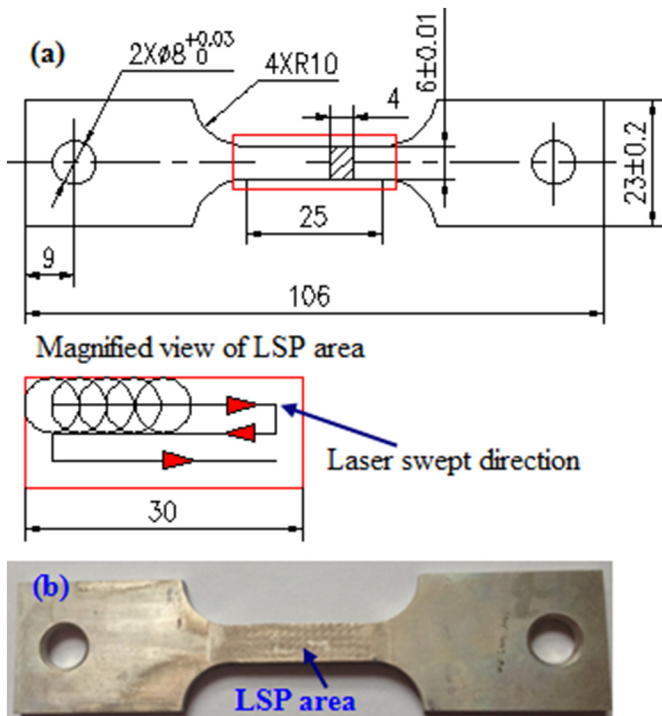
(a) Dimensions of SSRT specimen (unit: mm) and (b) photograph of laser treated sample.
